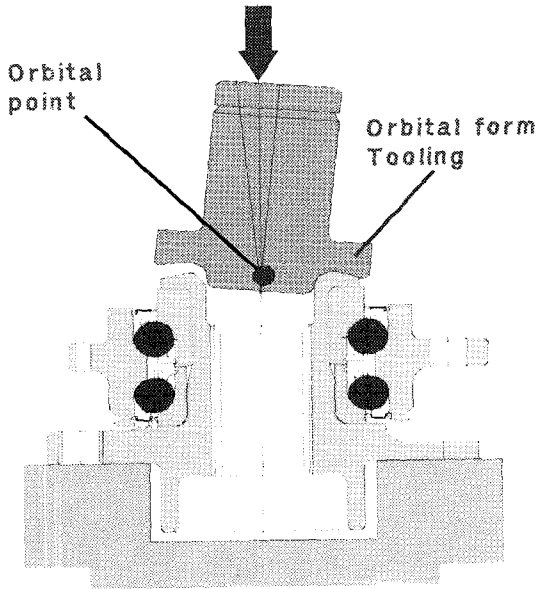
Schematic orbital forming process for assembling of wheel bearing
